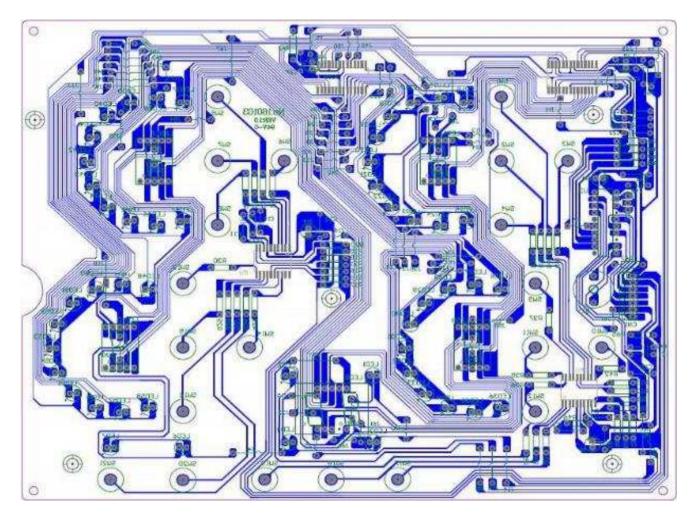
9 - PCB layout of Control PCB for models C96E-AABBB01 and C96E-AABBB02
